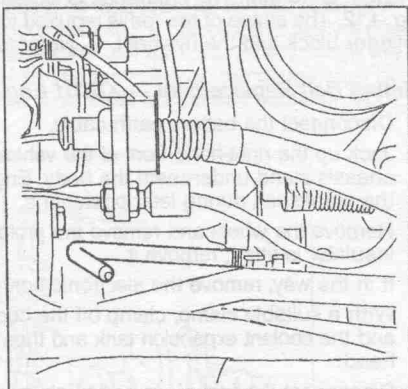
The locking rod (peg) for the flywheel is inserted in the position shown.
